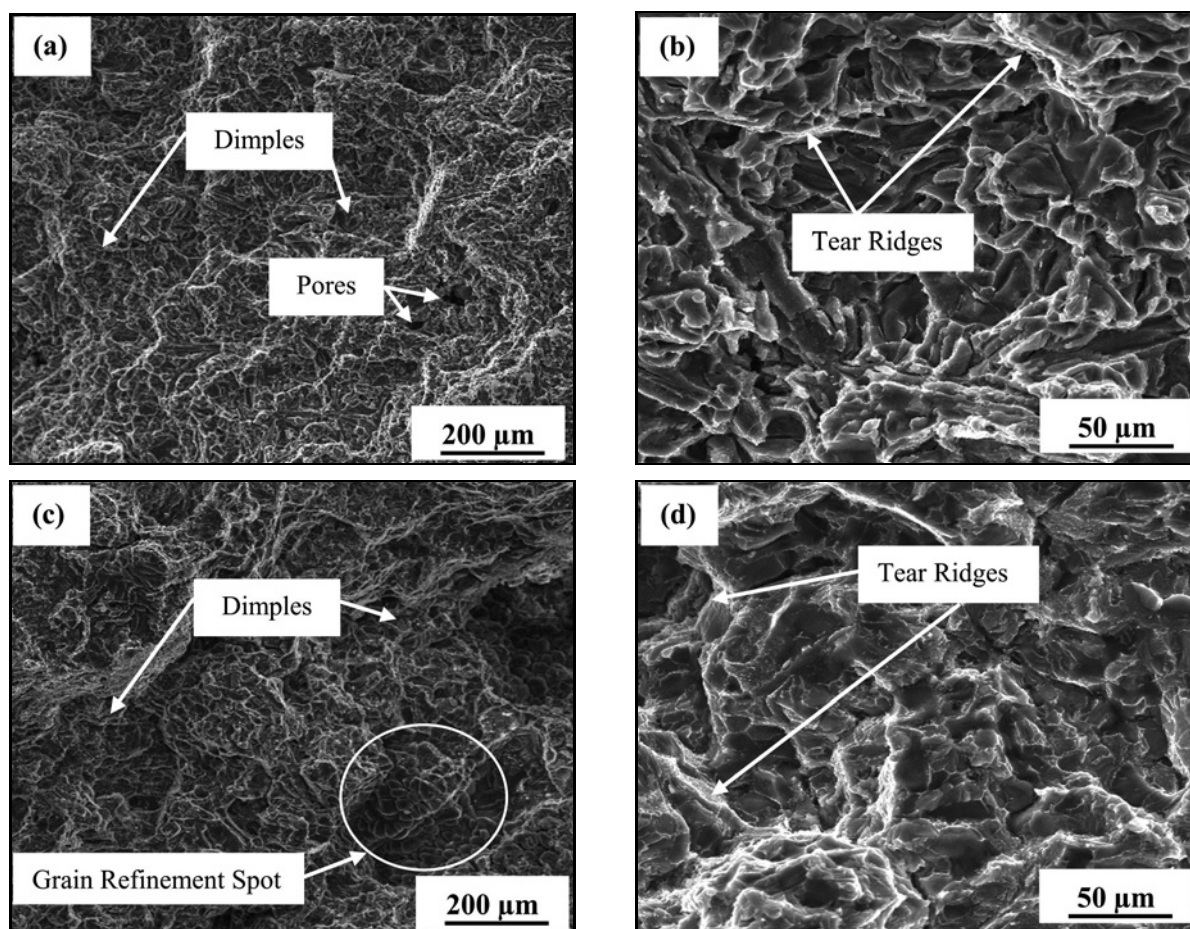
Fracture surface morphology of composite samples: (a) and (b) A1, (c) and (d) A2.
